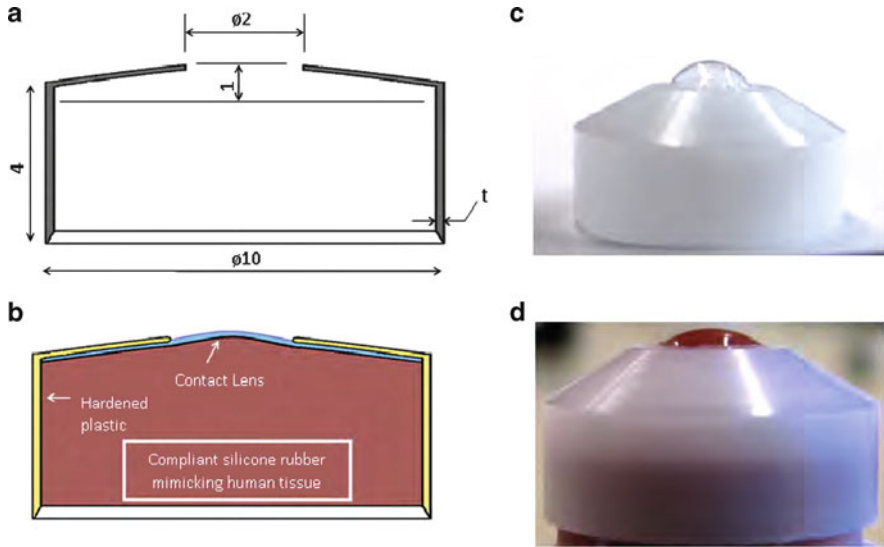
Details of the hydrogel contact lens probe. (a) Technical drawing of hardened plastic cover. (b) Sketch of final assembly. (c) Photograph of hardened plastic cover and passing form of hydrogel contact lens. (d) Photograph of final assembly
